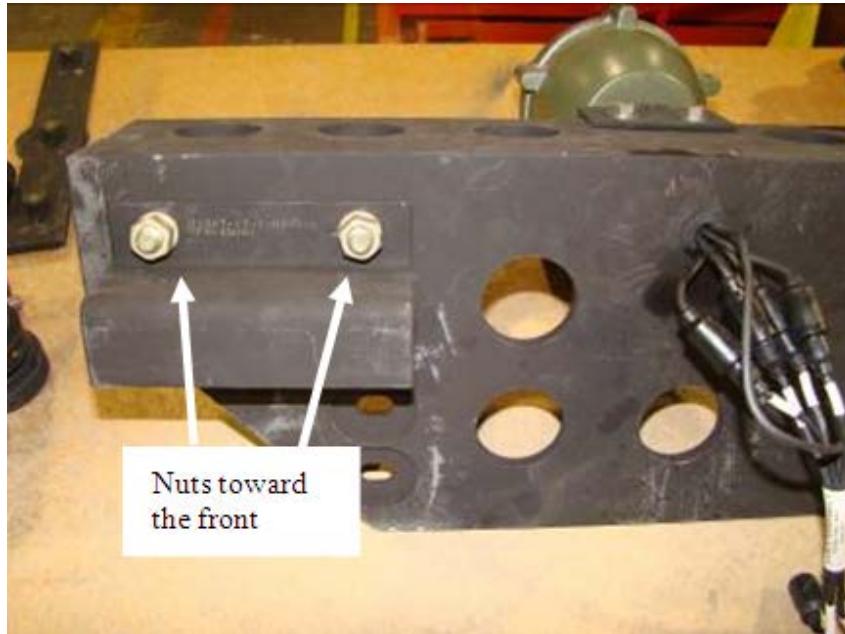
Clamp Bracket Installed on Mounting Bracket
